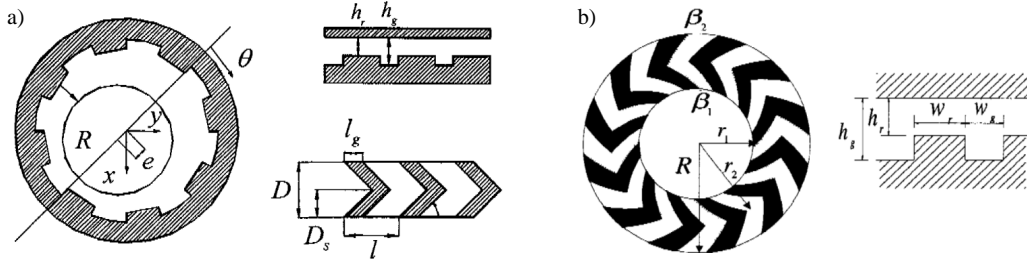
Schematic of a) Herringbone groove journal bearing b) Spiral groove thrust bearing with rectangular grooves in spindle motor [Oh and Rhim 2001]
